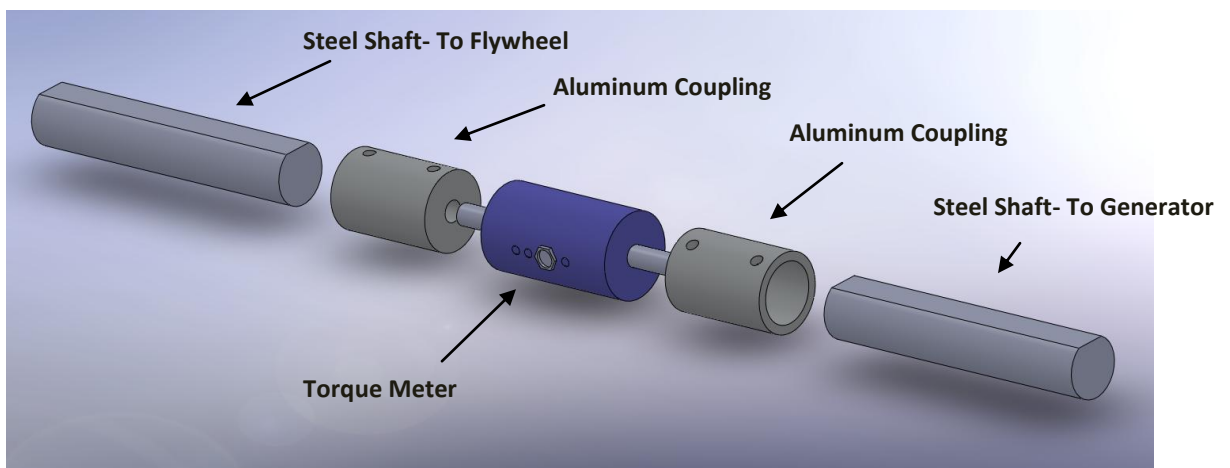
Solidworks Assembly of general layout of Torque meter setup
